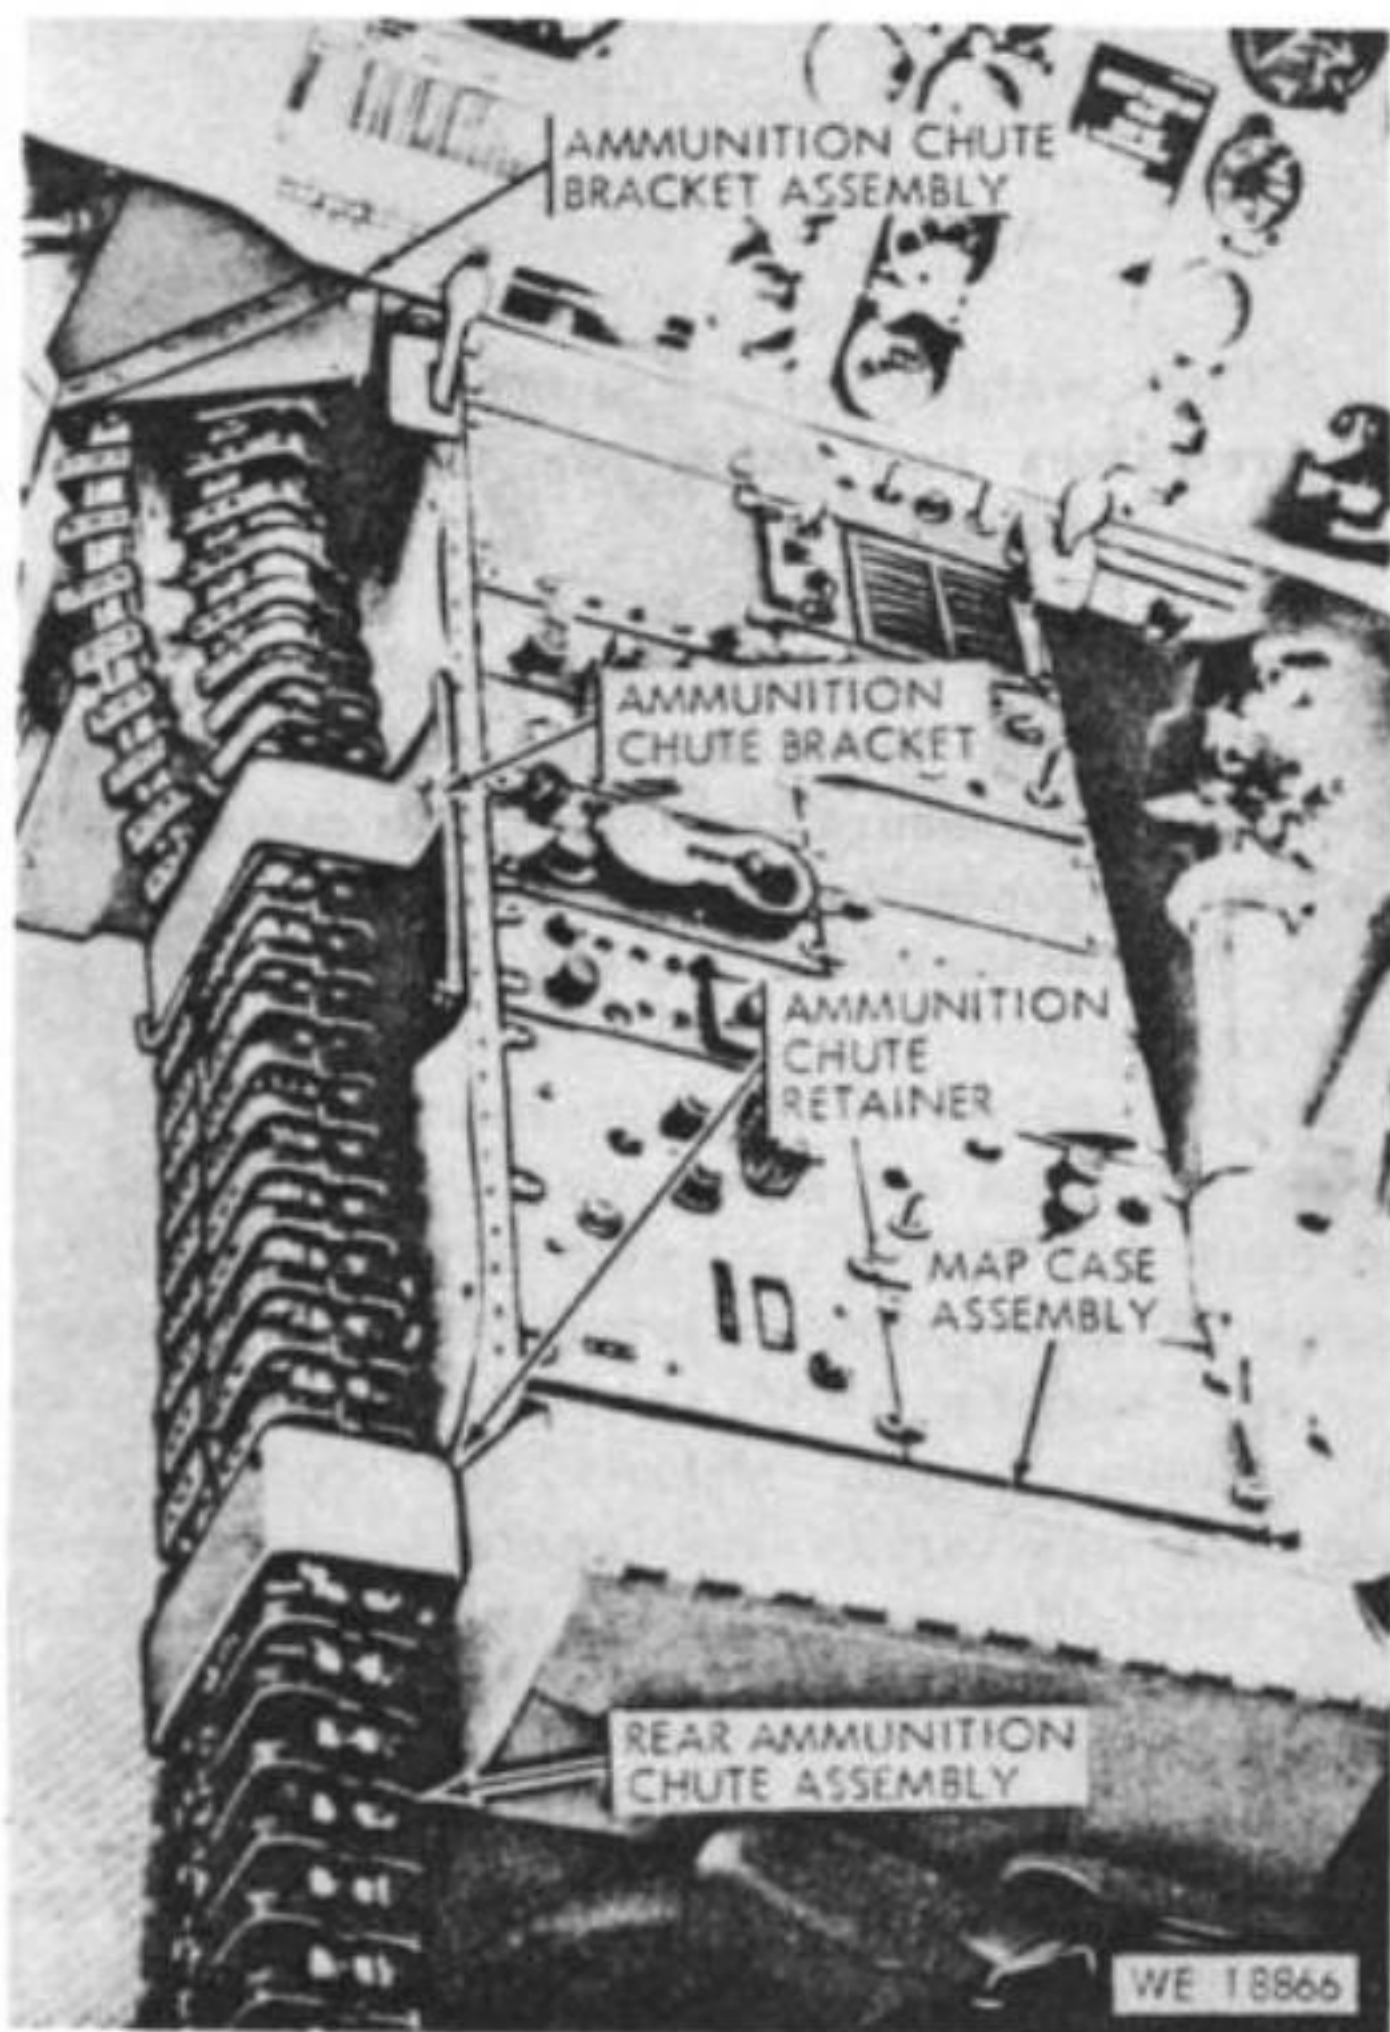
Rear ammunition chute assembly installed on left side of pedestal console.
